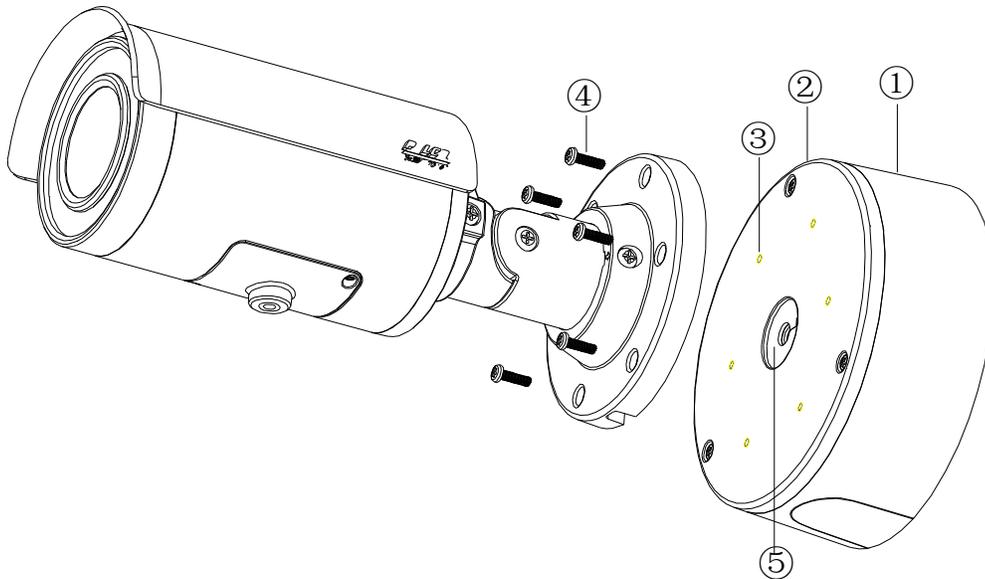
SURFACE MOUNT WITH IBP2BBAP-ES
